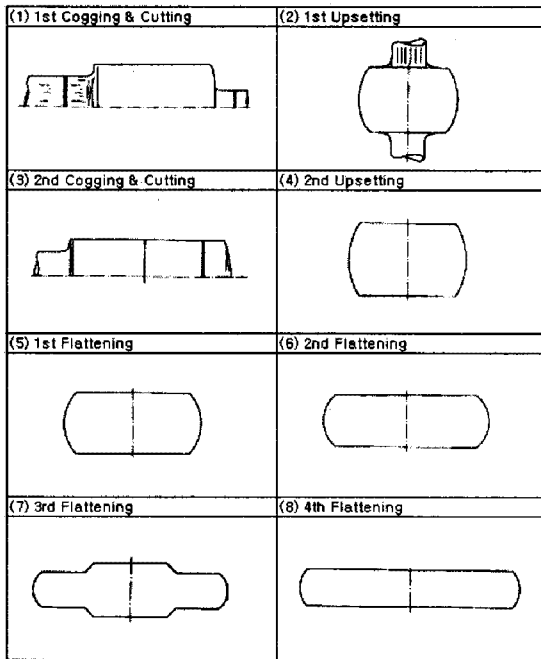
General Manufacturing Sequence of Large Steel Forgings
